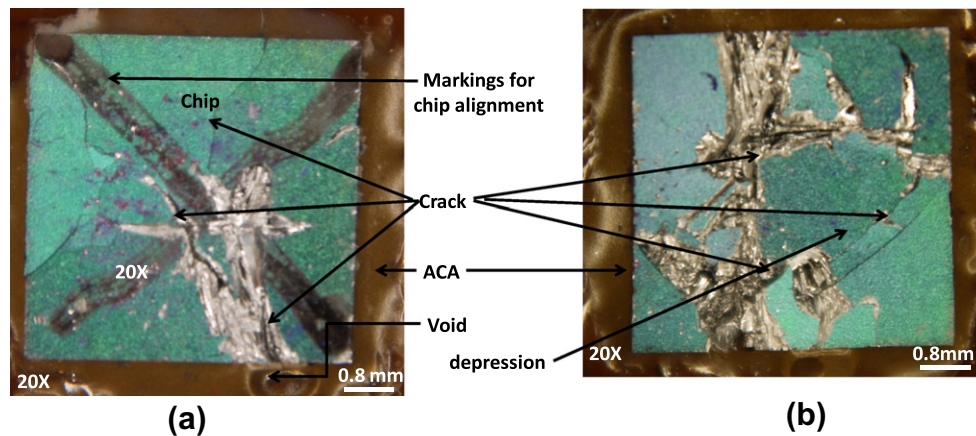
Micrographs showing the cracked die after mechanical testing.
